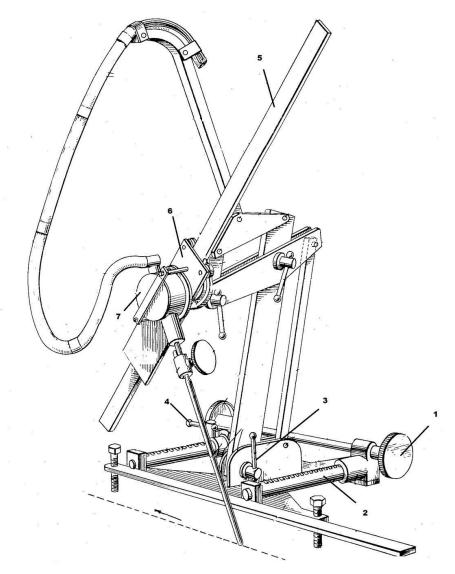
design appearance of the unit for gravity welding of straight welds
